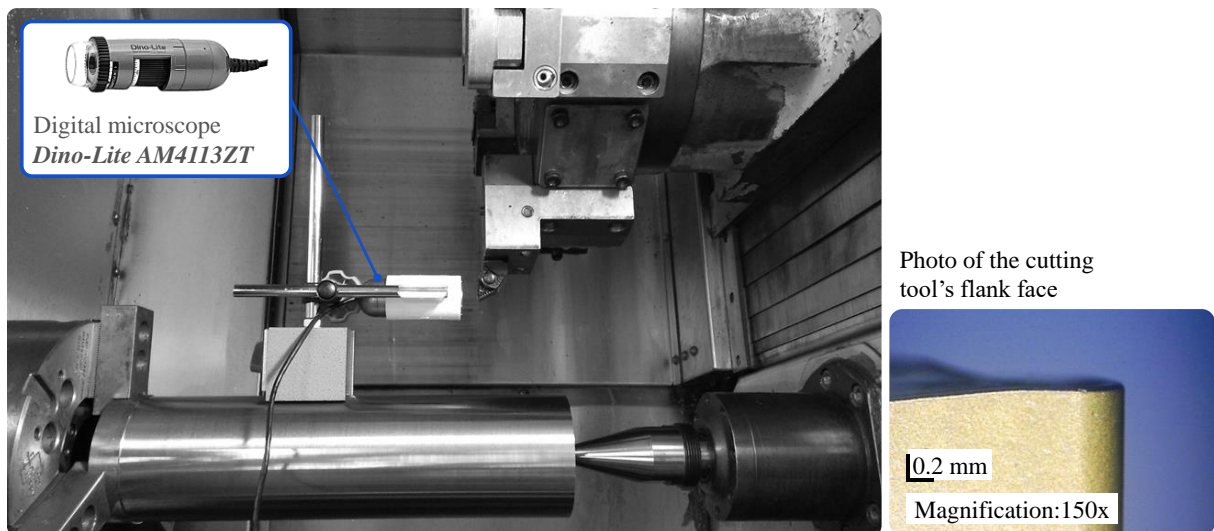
Tool wear assessment with a digital microscope. Measurement setup (left) and result example (right).
